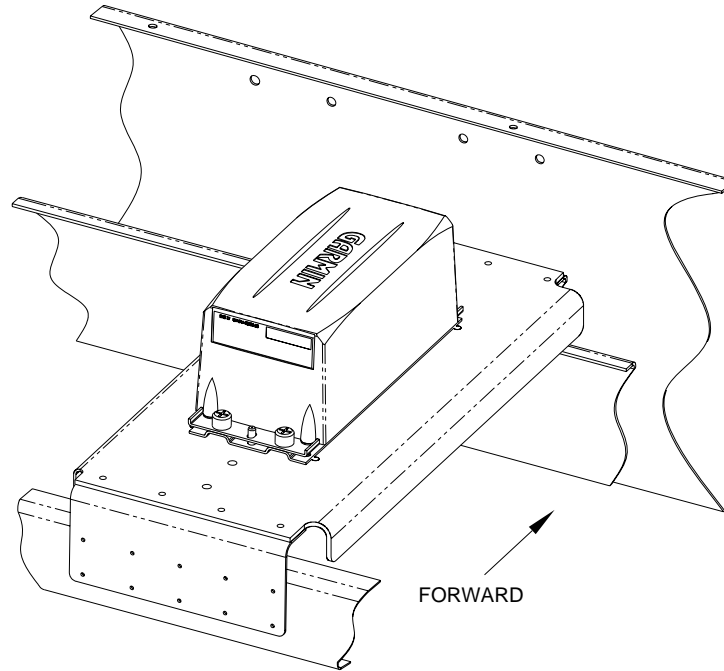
Modifying Existing Floor Panel or Add Mounting Surface to Attach GRS 77 Mounting Plate
